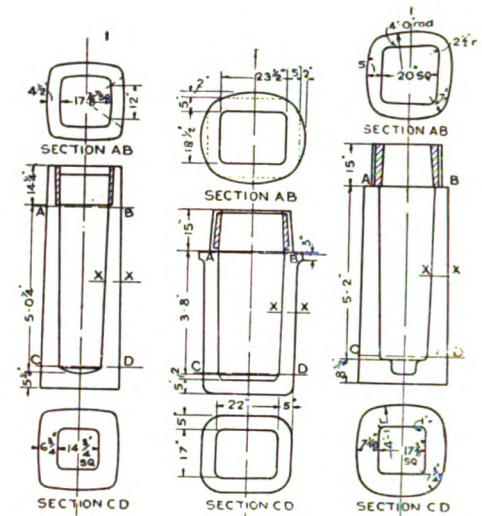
Mould D. FIG. 5.—Mould E. FIG. 6.—Mould F.
